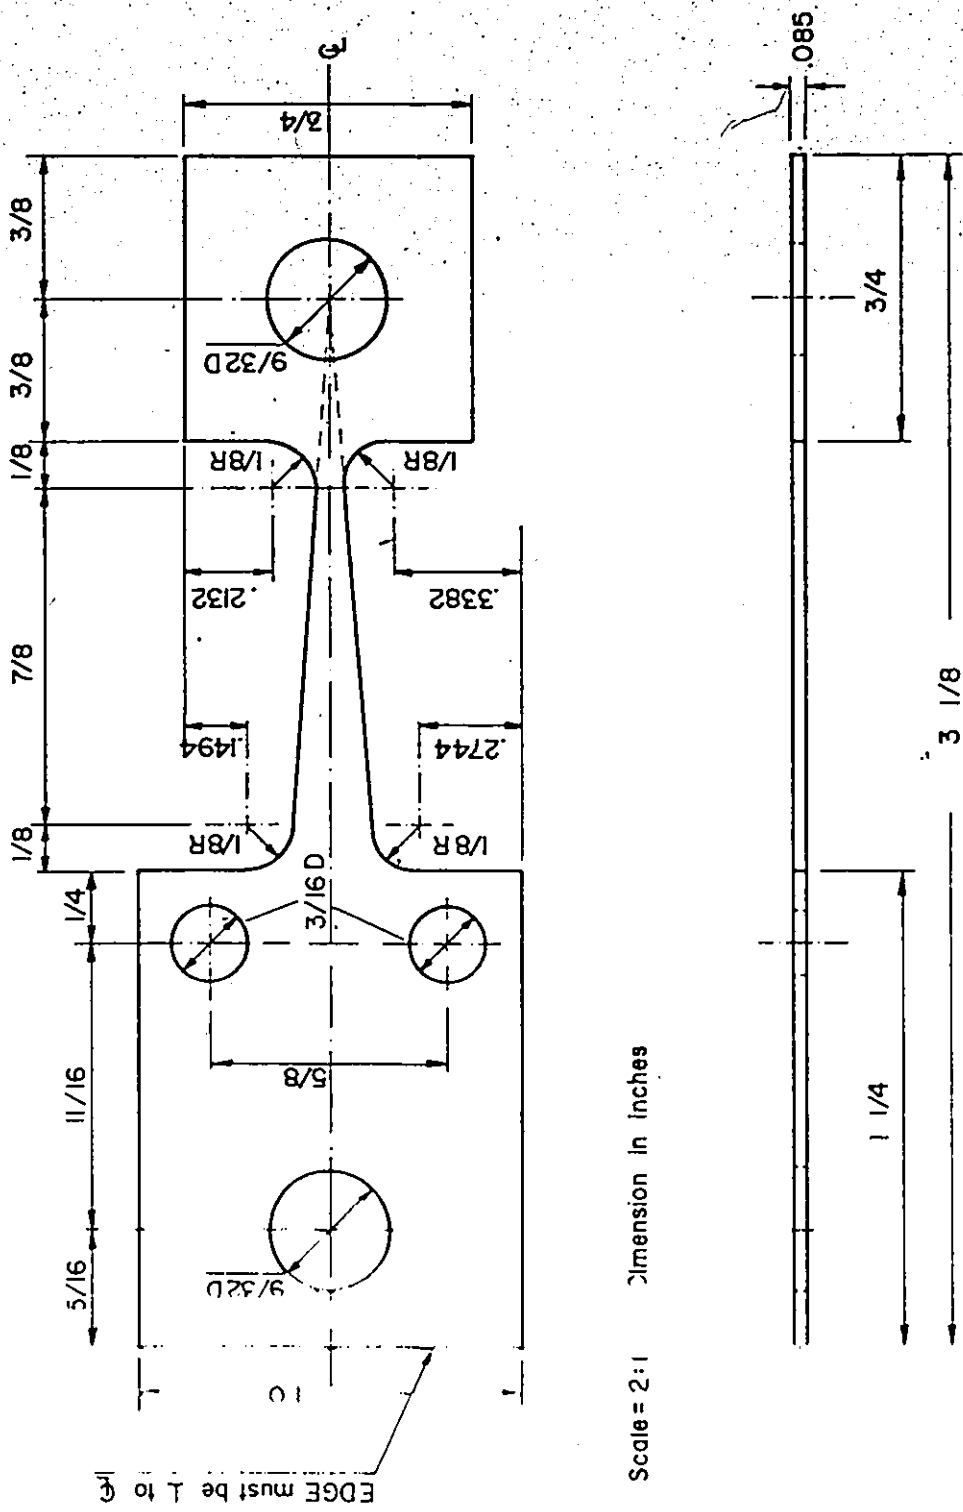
Configuration and Dimensions of the Bending Fatigue Test Specimen.
